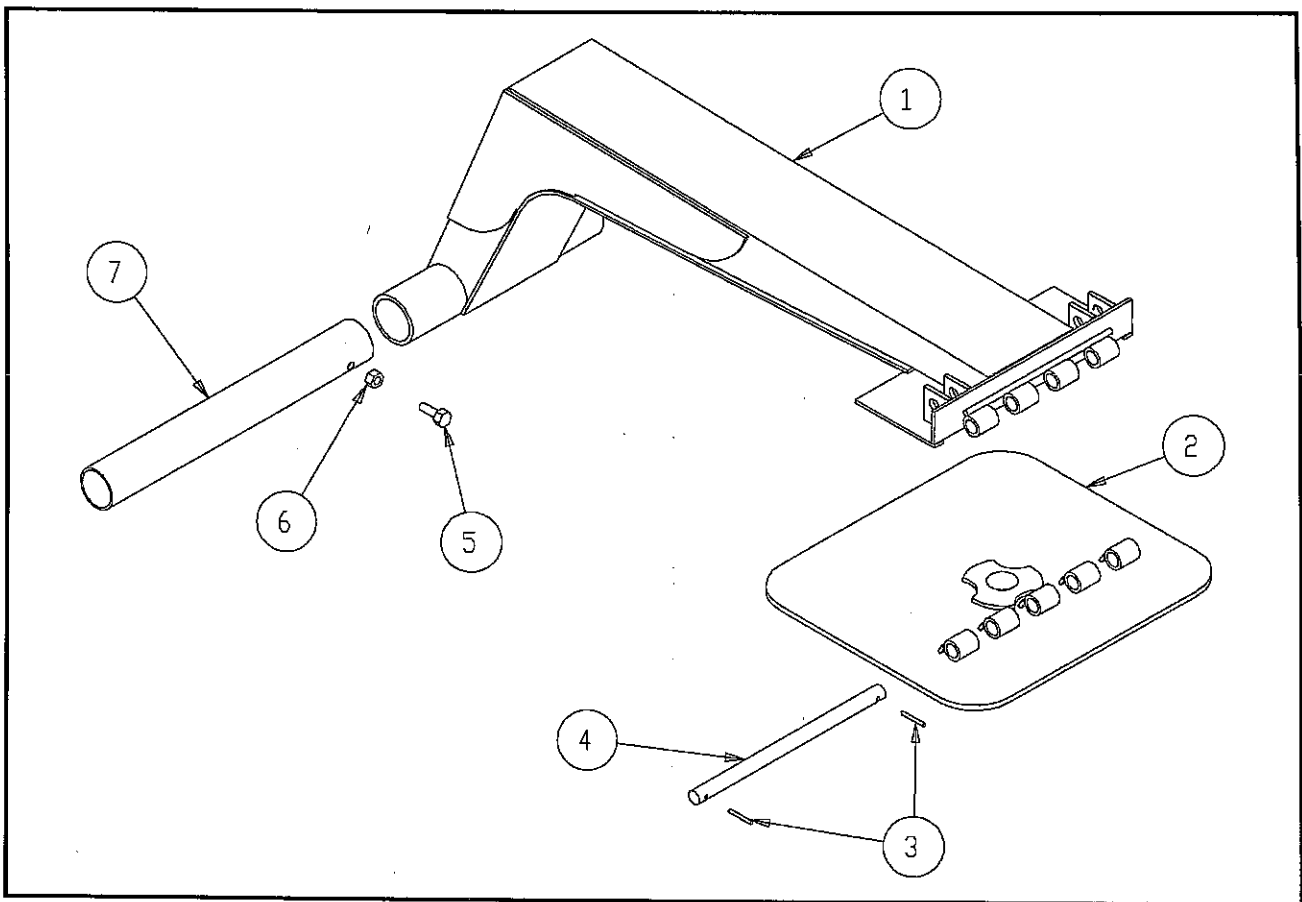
GOOSENECK LIFT ASSEMBLY
